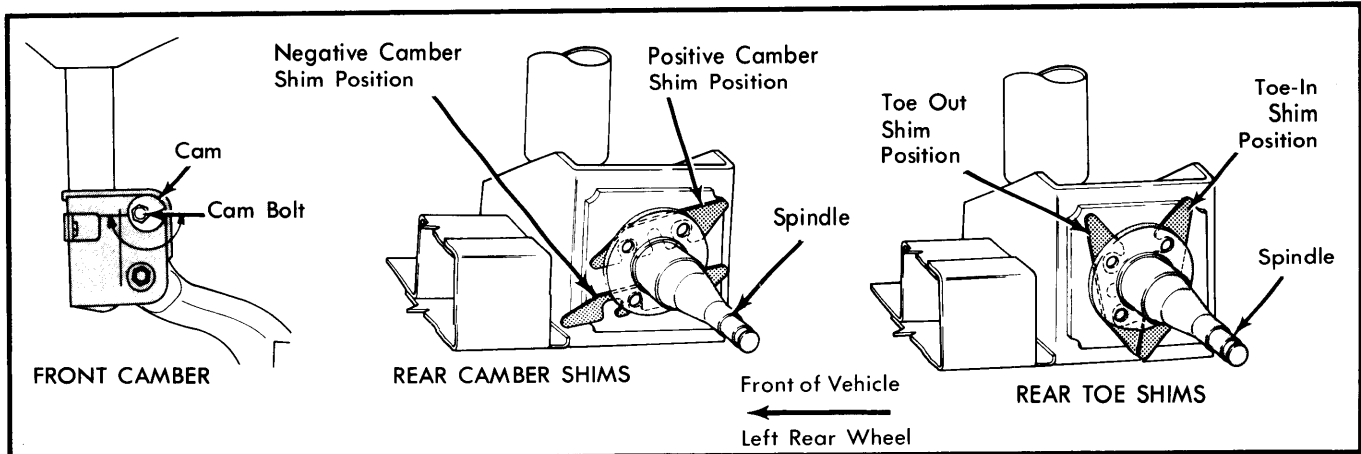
Adjusting Camber & Toe (Front & Rear)
